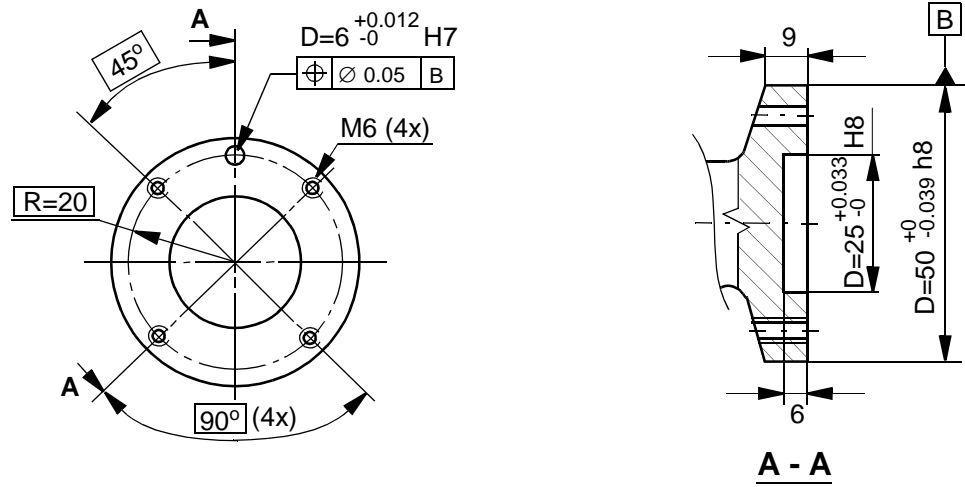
The mechanical interface, mounting flange (dimensions in mm).
